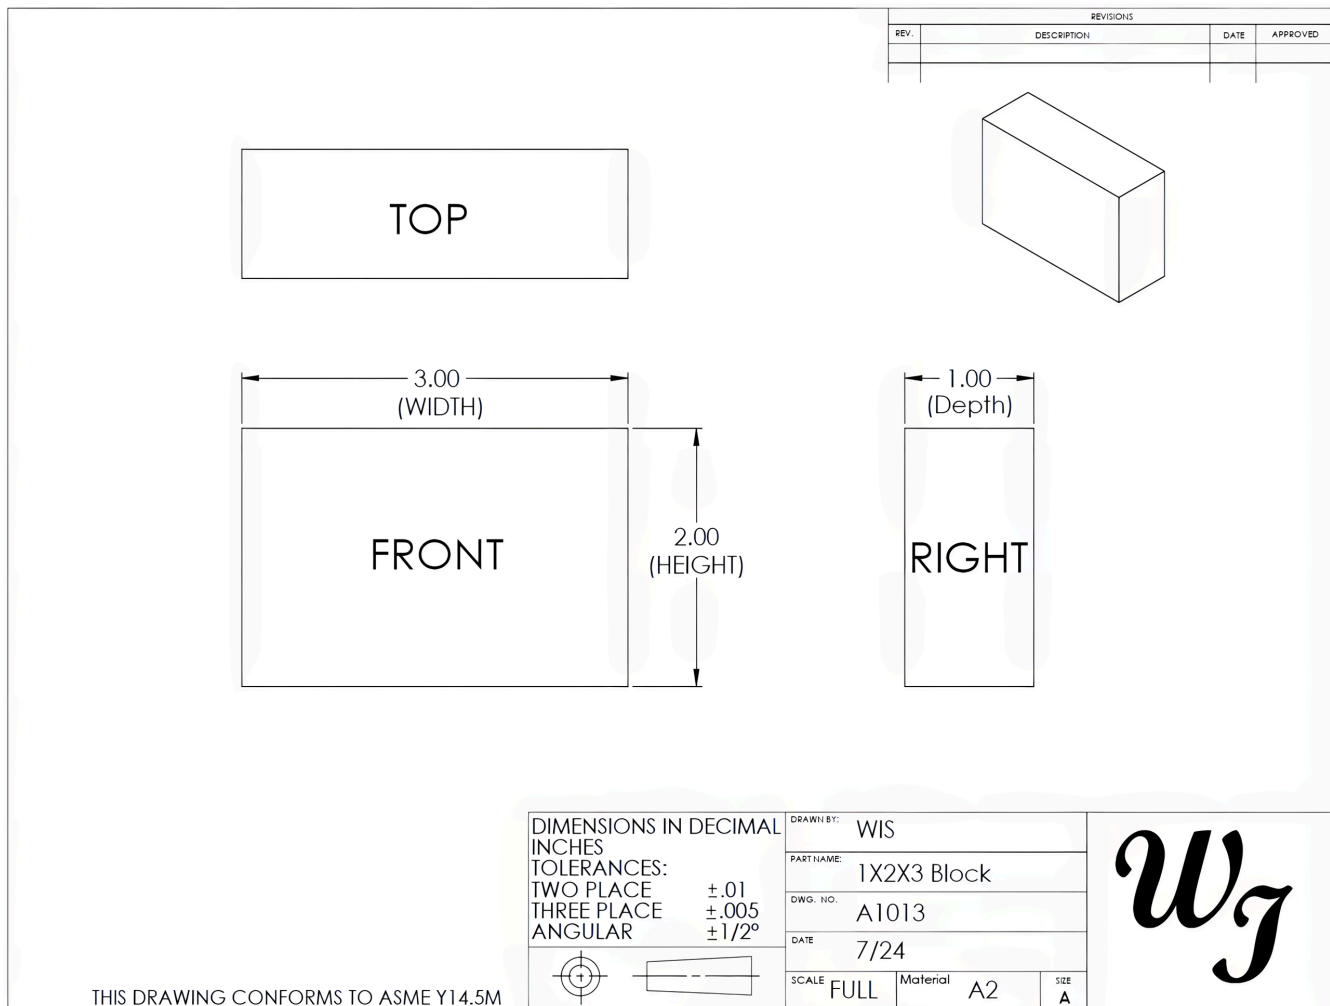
Part drawing identifying the placement of the height, width, and depth values.
